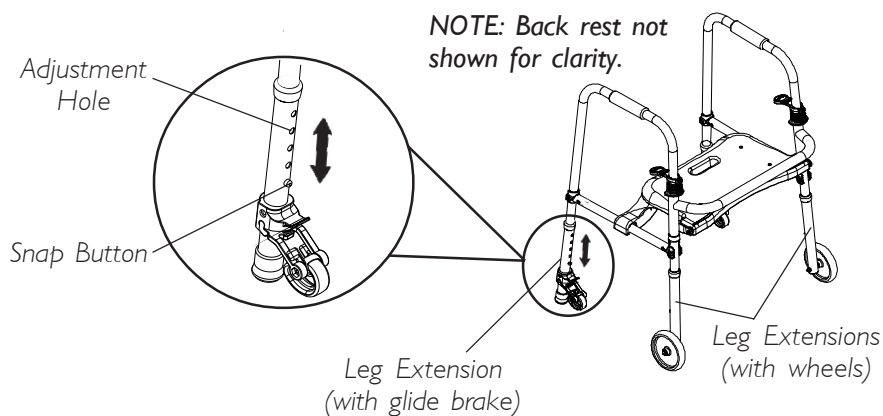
INSTALLING/ADJUSTING LEG EXTENSIONS
